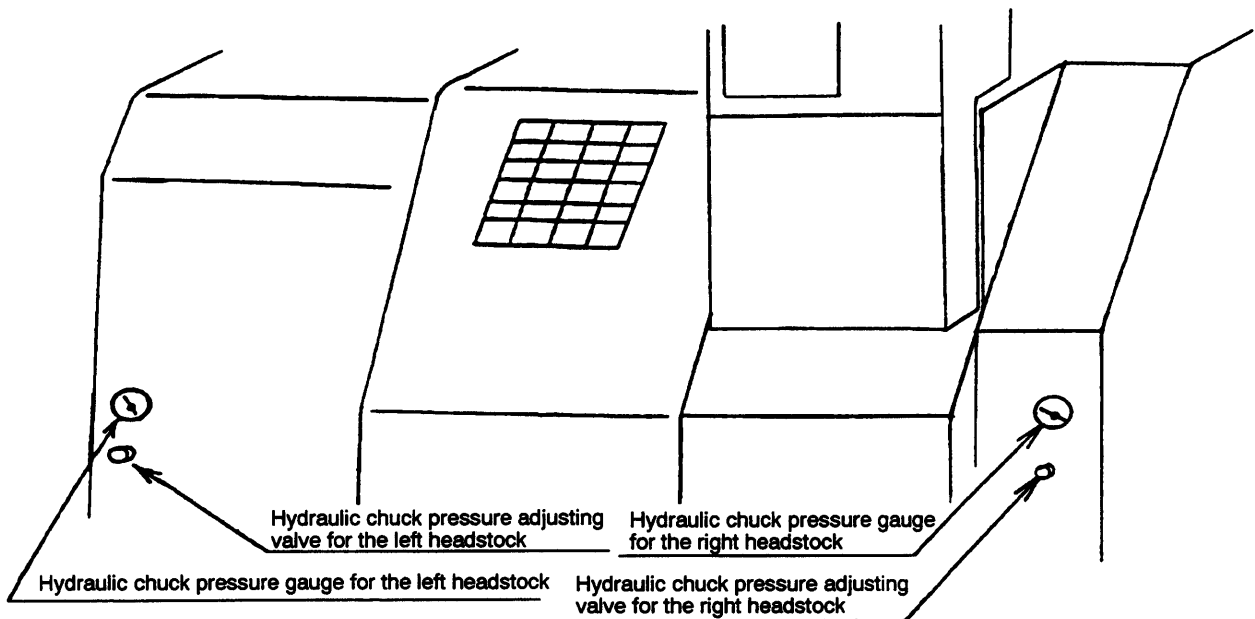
Hydraulic Pressure for Hydraulic Chuck
